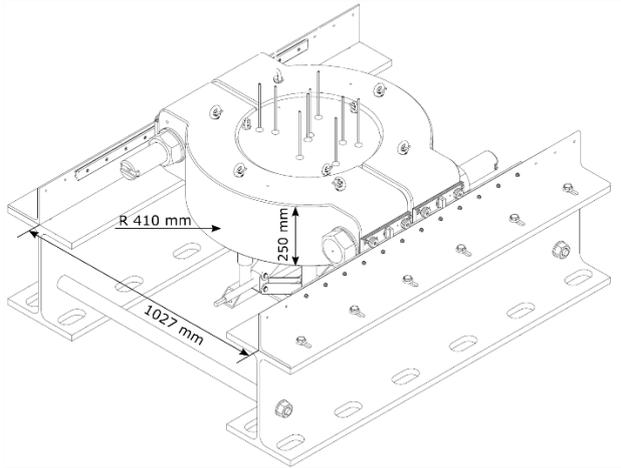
Mechanical Pipe Connector proof-of-principle test bench isometric views
